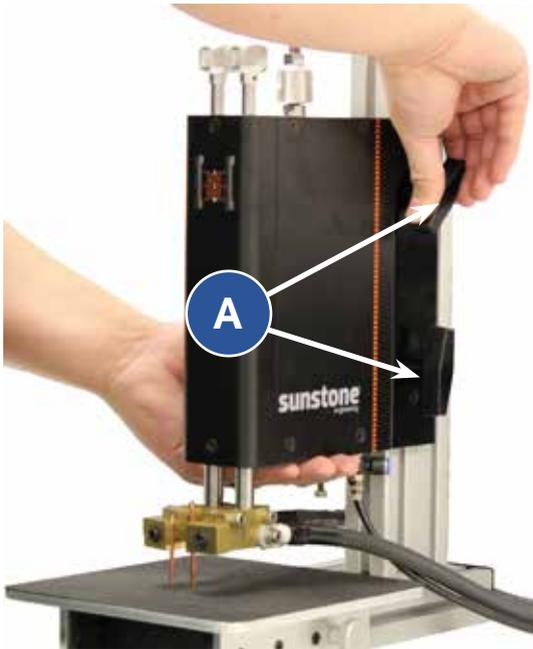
To adjust the height of the weld head, place one hand under the weld head for support. With the other hand, loosen the Weld Head Height Adjustment Knobs (A). Position as desired, and then tighten the knobs.
